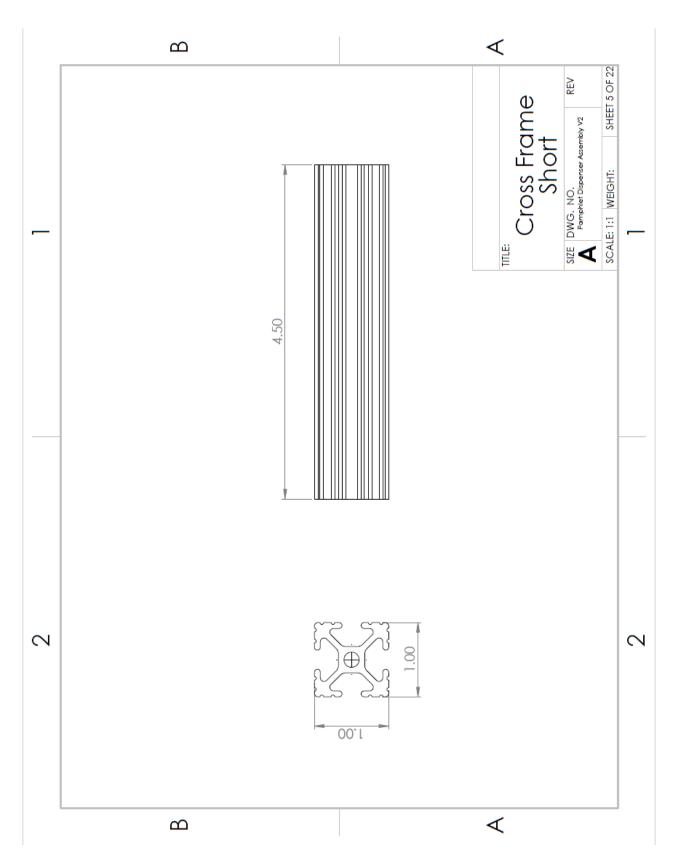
Pamphlet Dispenser Cross Frame Short Drawing (not to scale)
